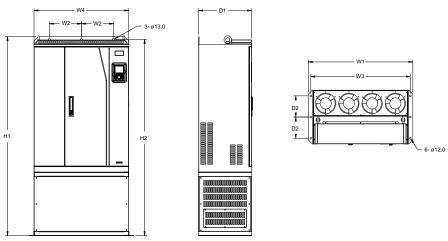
Floor installation diagram of inverters of 460V 220–315kW
